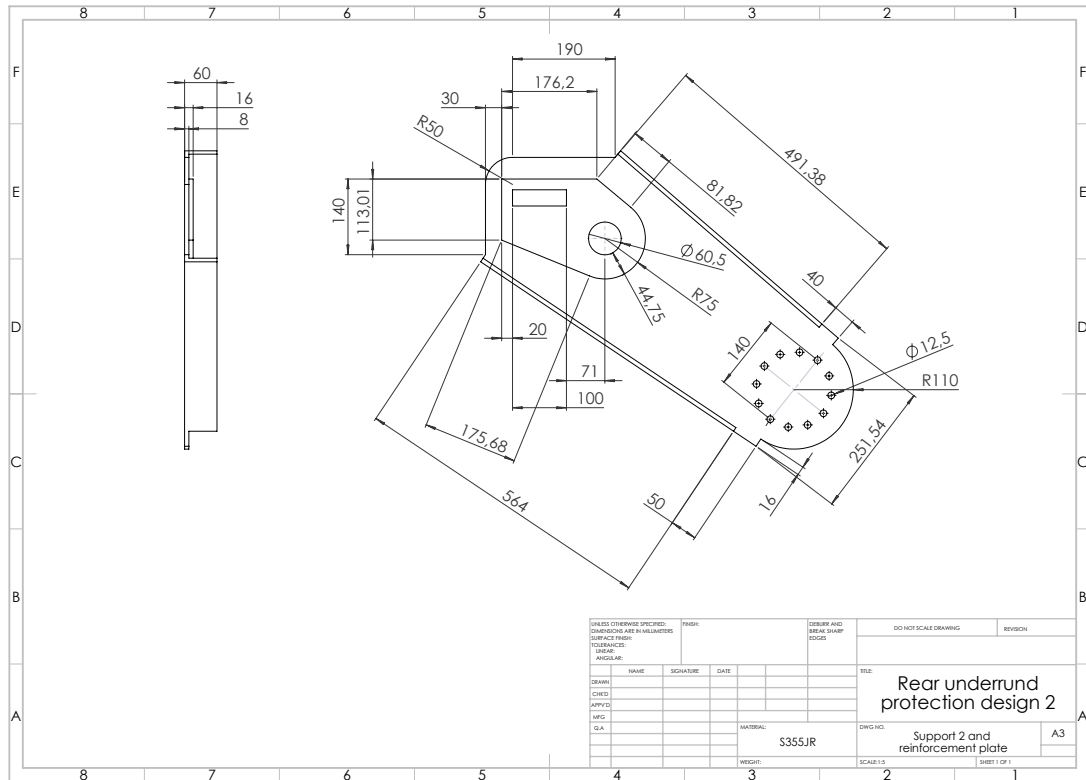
Technical drawing of the support 2 and the reinforcement plate, with their respective dimensions
